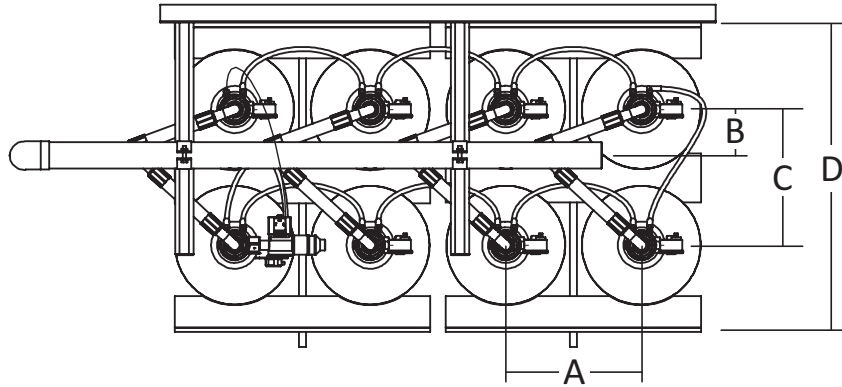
2 Row Wooden Racking System with Wooden Bracketing, Side View
